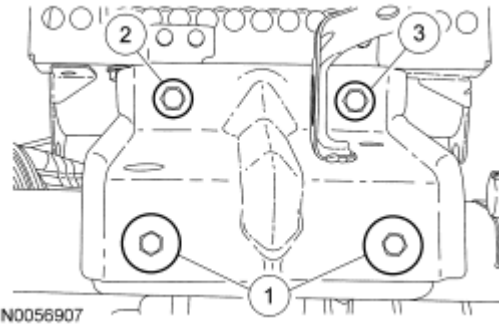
Installing Passenger Air Bag Module Support Bracket Bolts In Sequence
